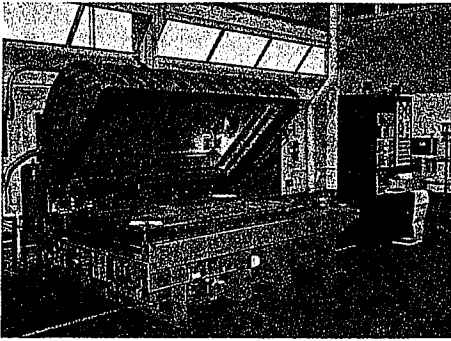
Vacuum pressure chamber. Courtesy of Naval Air Rework Facility, San Diego
